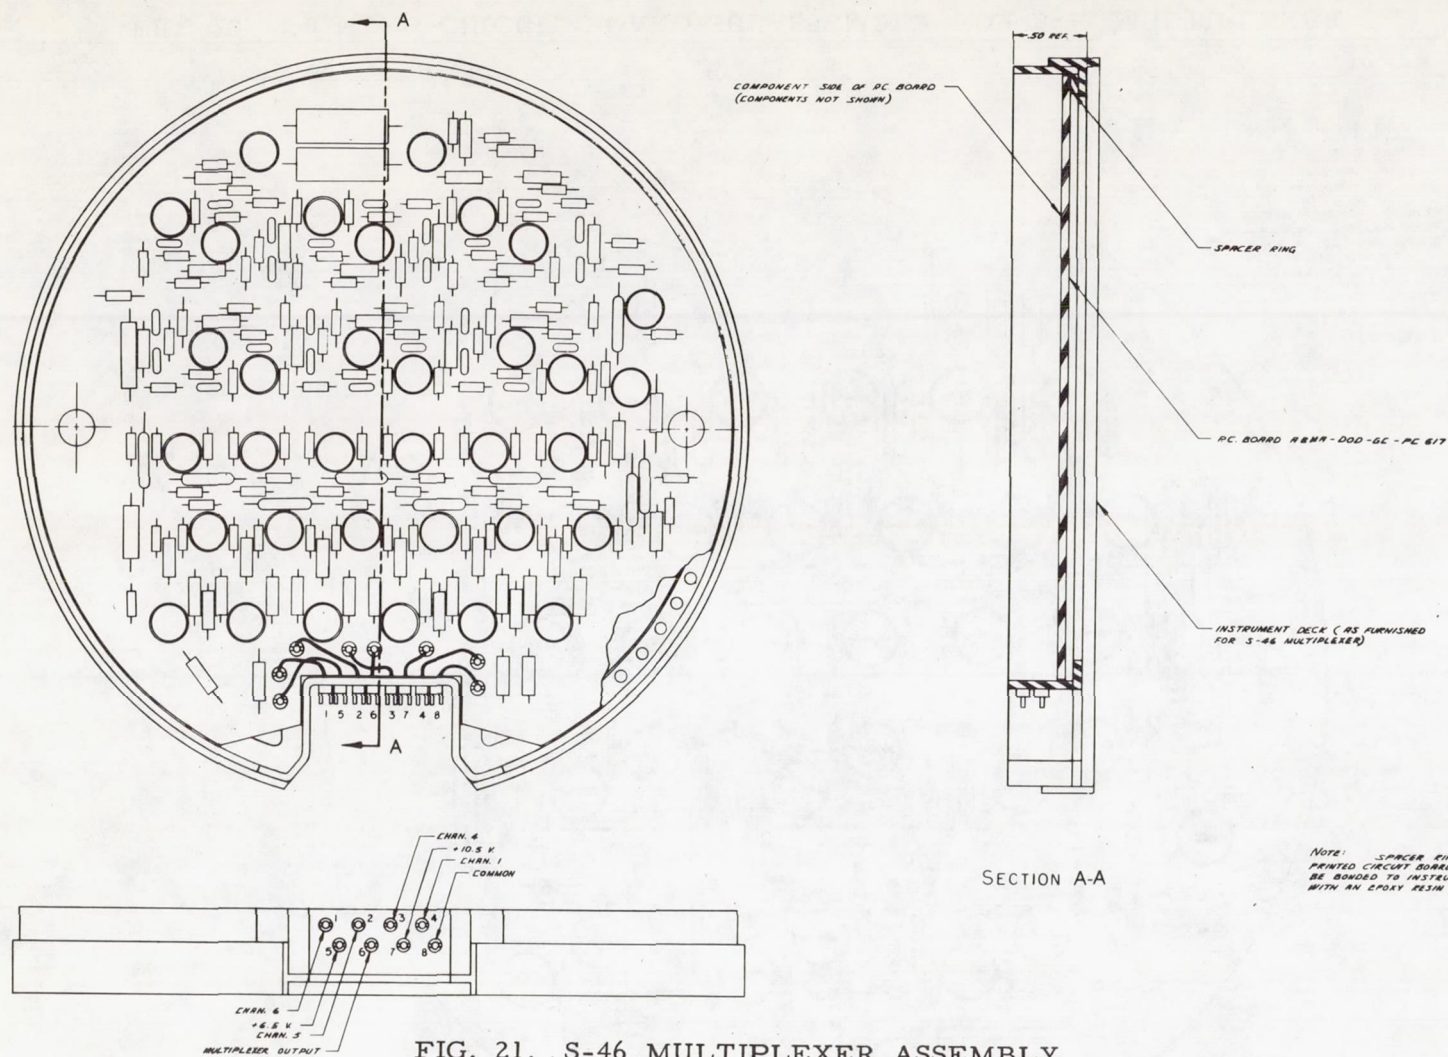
S-46 MULTIPLEXER ASSEMBLY
